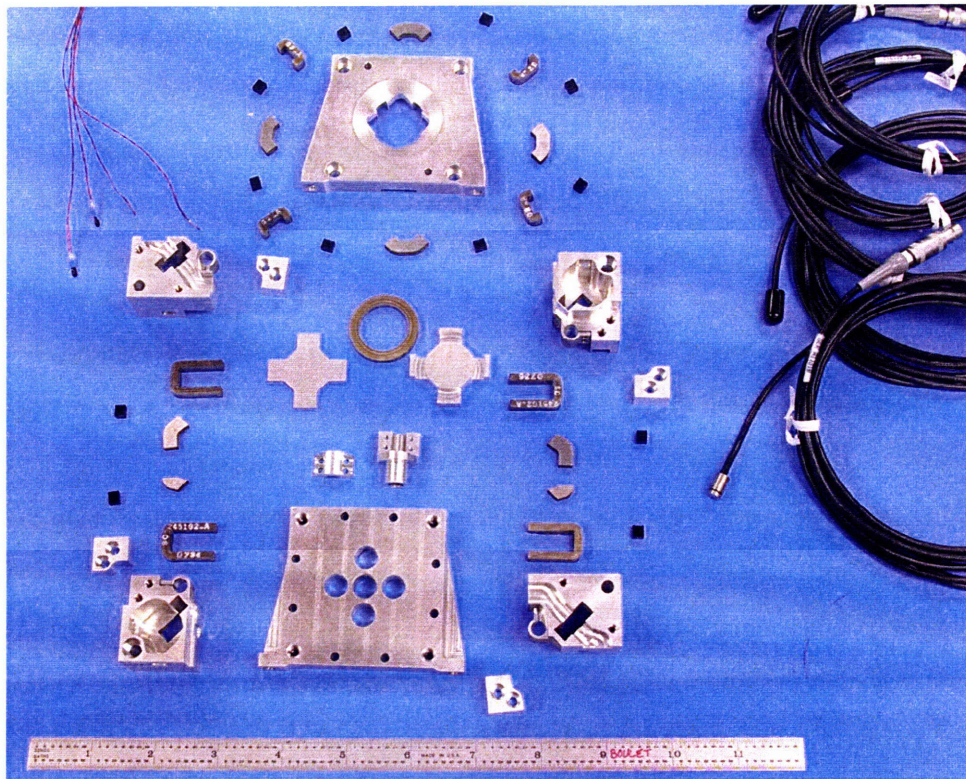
sAFSM Fabricated Parts Set, Excluding Coils
